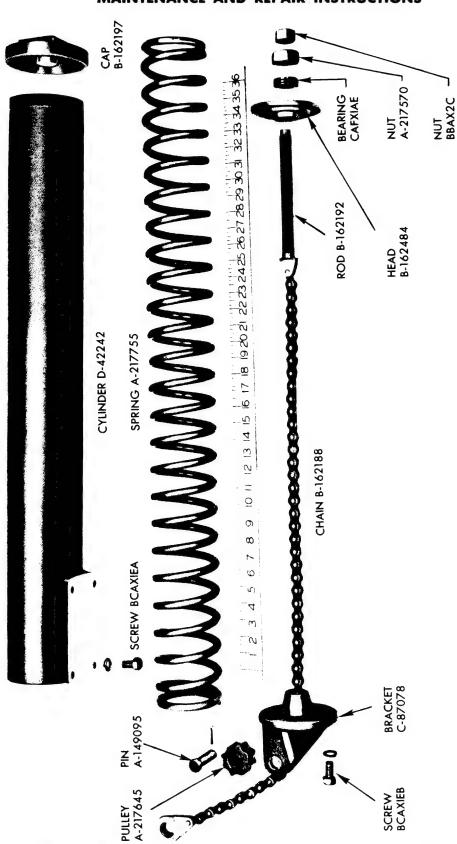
Equilibrator Assembly, M3A1 Carriage—Exploded View
